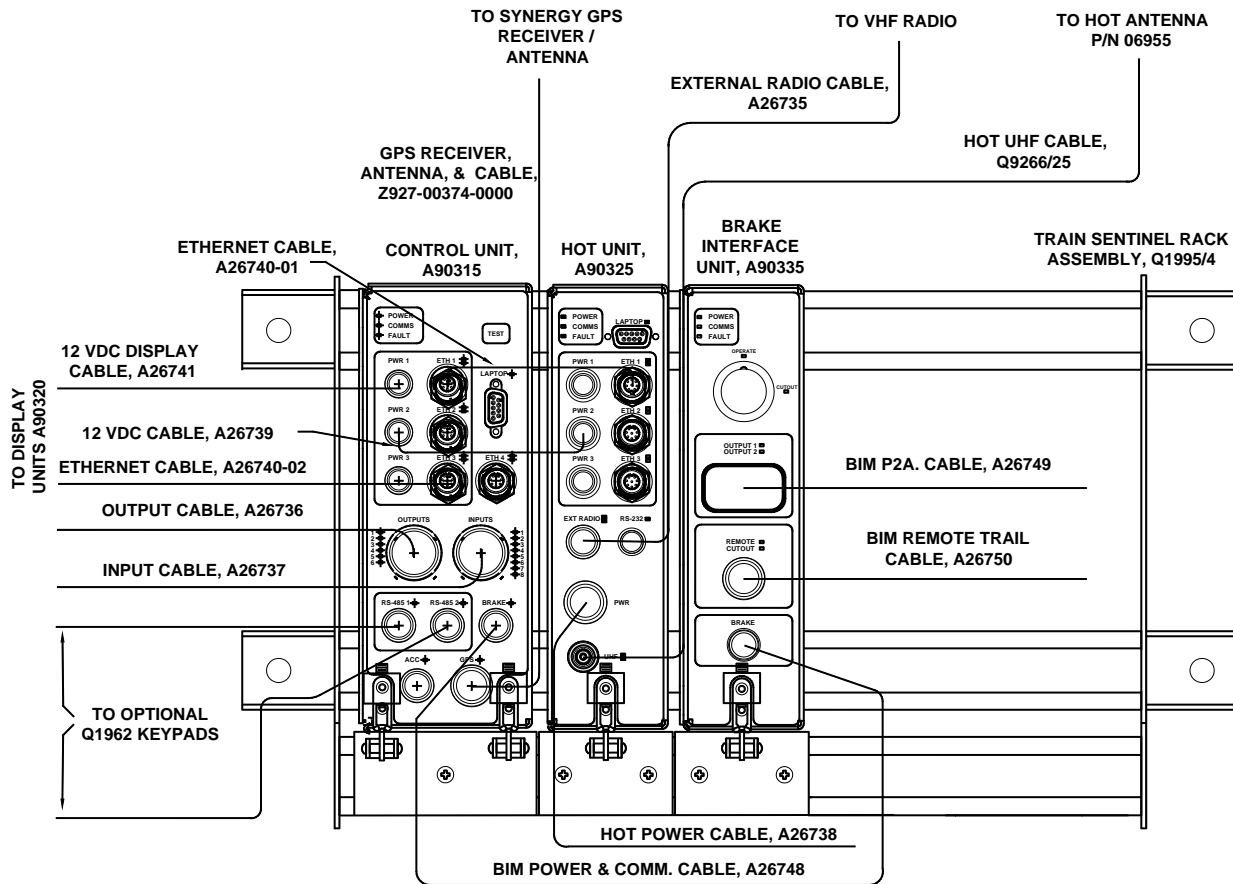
Sentinel Modules Mounted on Cab Rack Assembly
